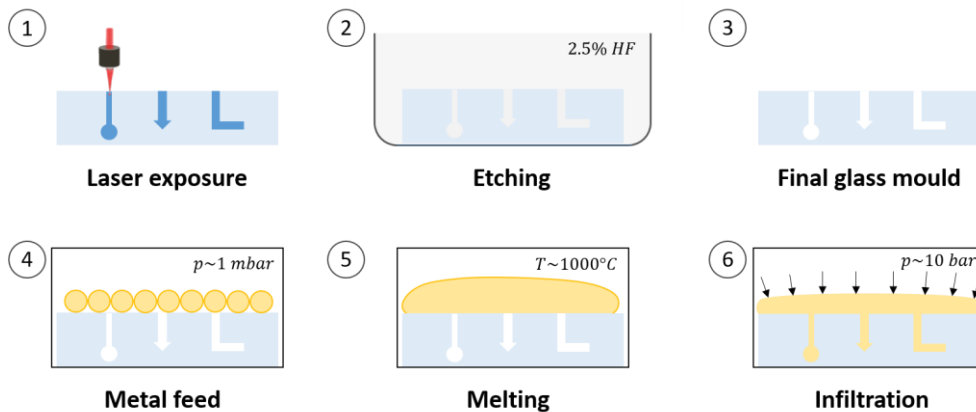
Schematic of the microcasting process: 1. laser machining; 2. wet chemical etching; 3. final glass mould; 4. mould and metal feed are placed under vacuum in the infiltration chamber; 5. the temperature is raised to melt the metal; 6. about 10 bar of pressure is applied to obtain the infiltration of the cavities.
